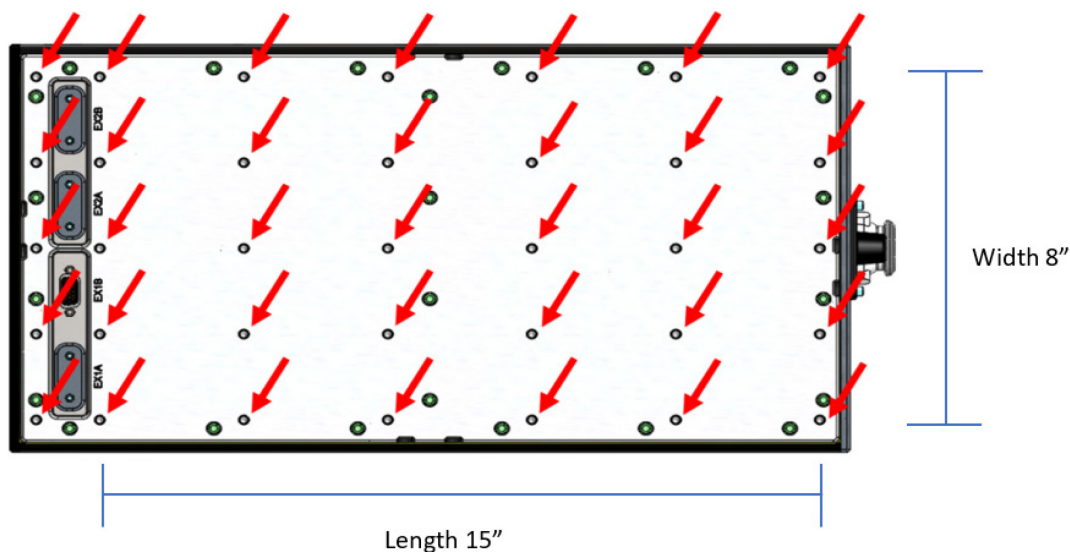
PC Mounting Plate with Attachment Hole Pattern and Electrical/Data Connectors
